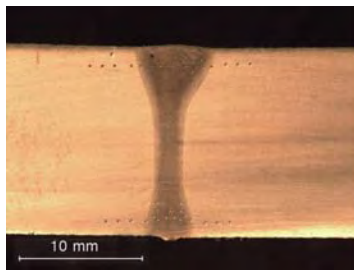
The macro sample of 15mm plate welded with laser hybrid welding. The weld quality is visually approvable
